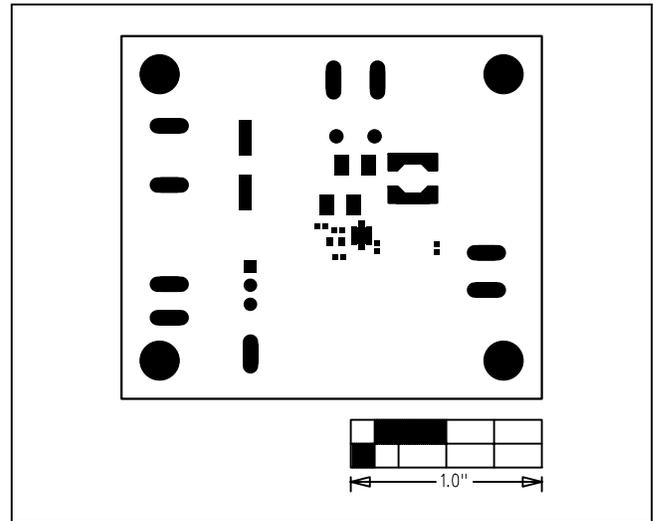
MAX17502F EV Kit PCB Layout—Top Solder Mask
